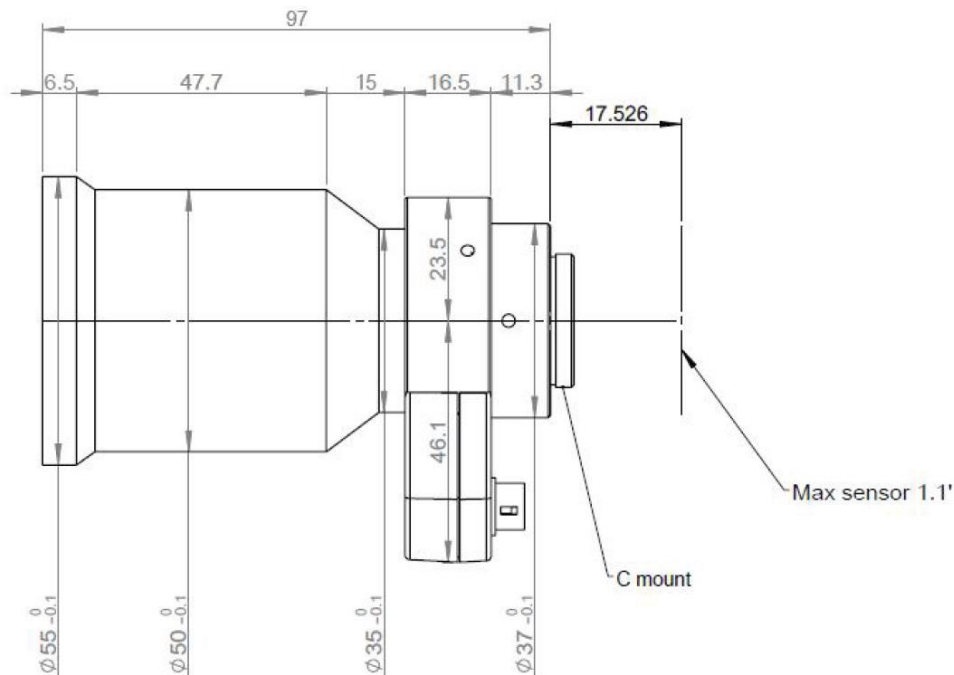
Mechanical drawing of the ELM-16-4.8-18-C
